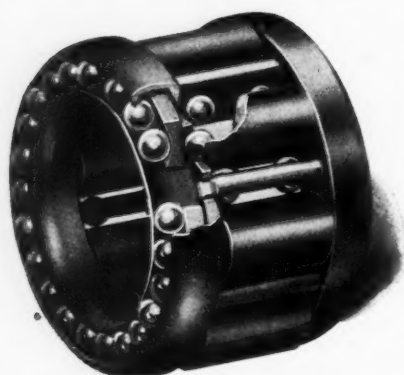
The Johnson Bearing for taking Both Radial Load and End Thrust
